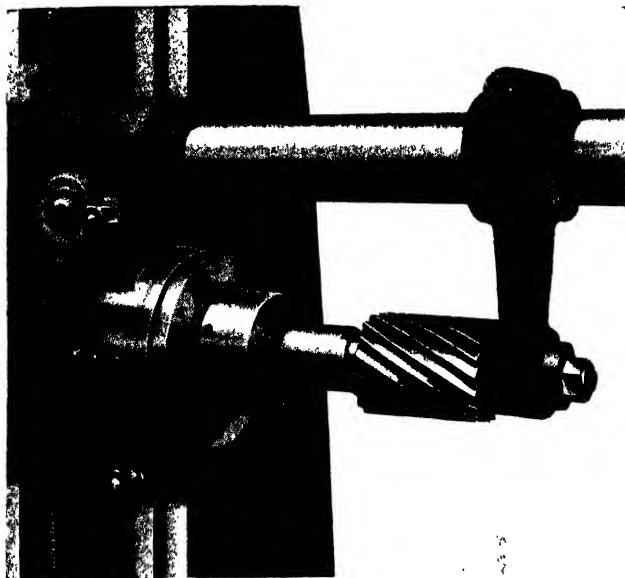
Cylindrical Milling Cutter held on a Boring Machine Spindle.
